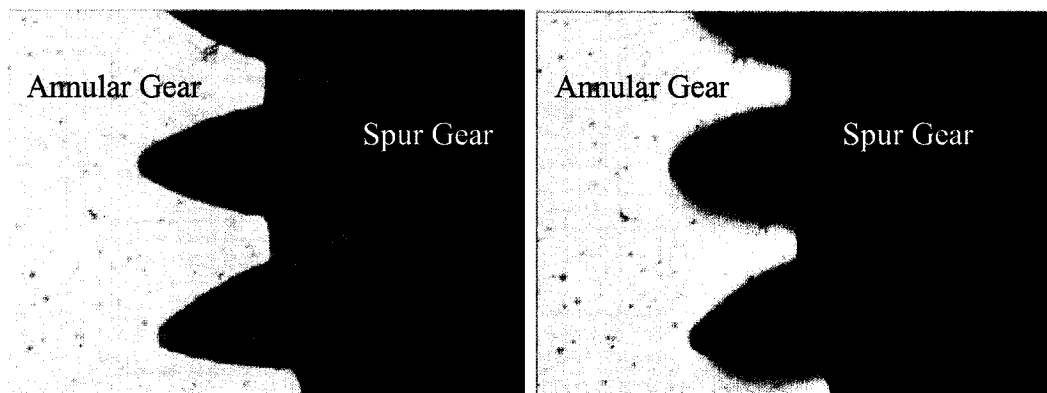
Image of the spur gear and annular gear mate during assembly. Left, the gear teeth prior to the mate while the right image shows the teeth mated.
